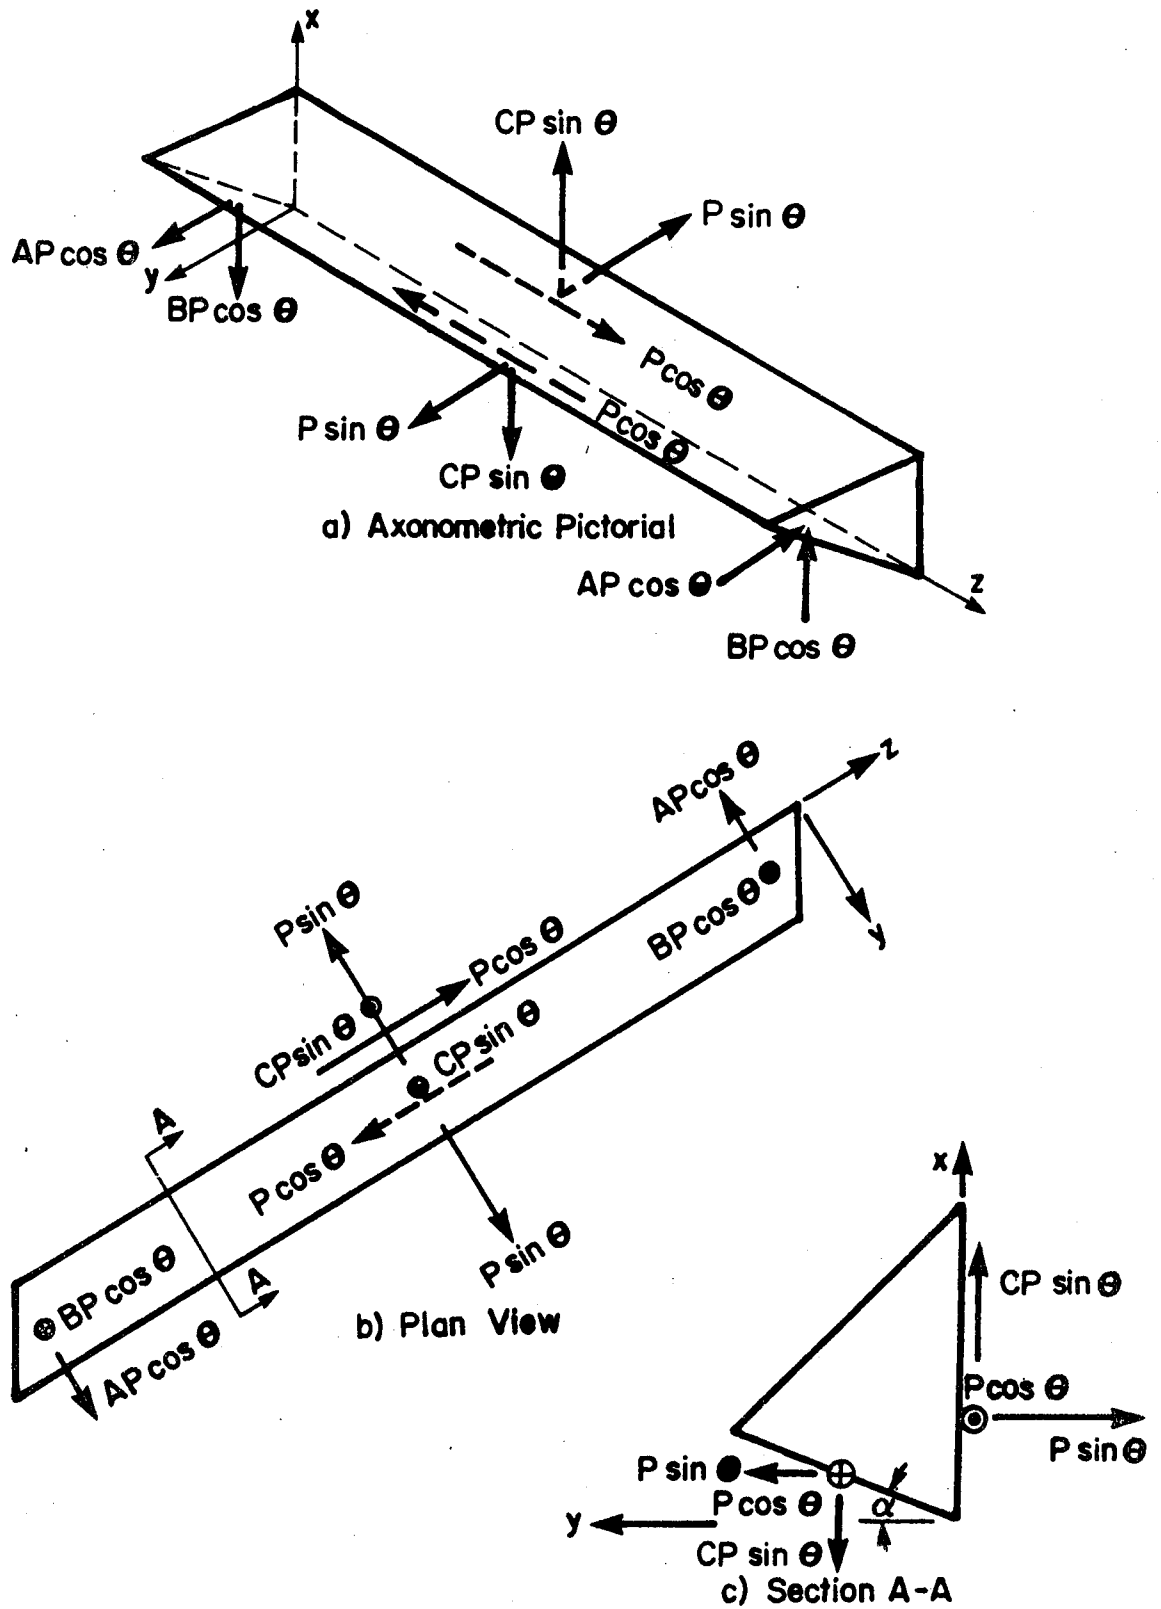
Equilibrium Of A Fillet Weld
